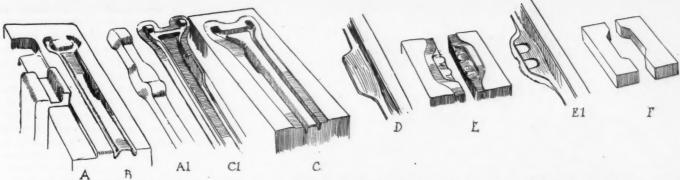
Steps and dies used in forging a front axle. A shows the die used in the first operation, that of butting up the end of the square bar as at A1 for the spring seat; B is the die that gives the rough form for the yoke end, also the beginning of the formation of the I section; C is the die that gives it more nearly its final shape and C1 is the end of the axle after it comes from C; the web around C1 is called the flash and is cut off next; D shows the spring seat urned over and flattened out; E is the die that finishes the spring seat and E1 is the piece after leaving E; F is the die in which the flash or web on E1 is trimmed off
